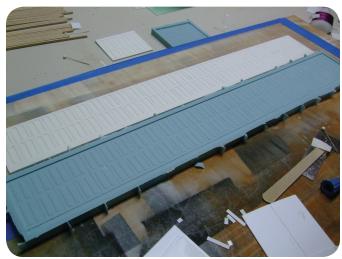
The long paneled wall for the paddle-wheel enclosure was built and then used to cast a second.
